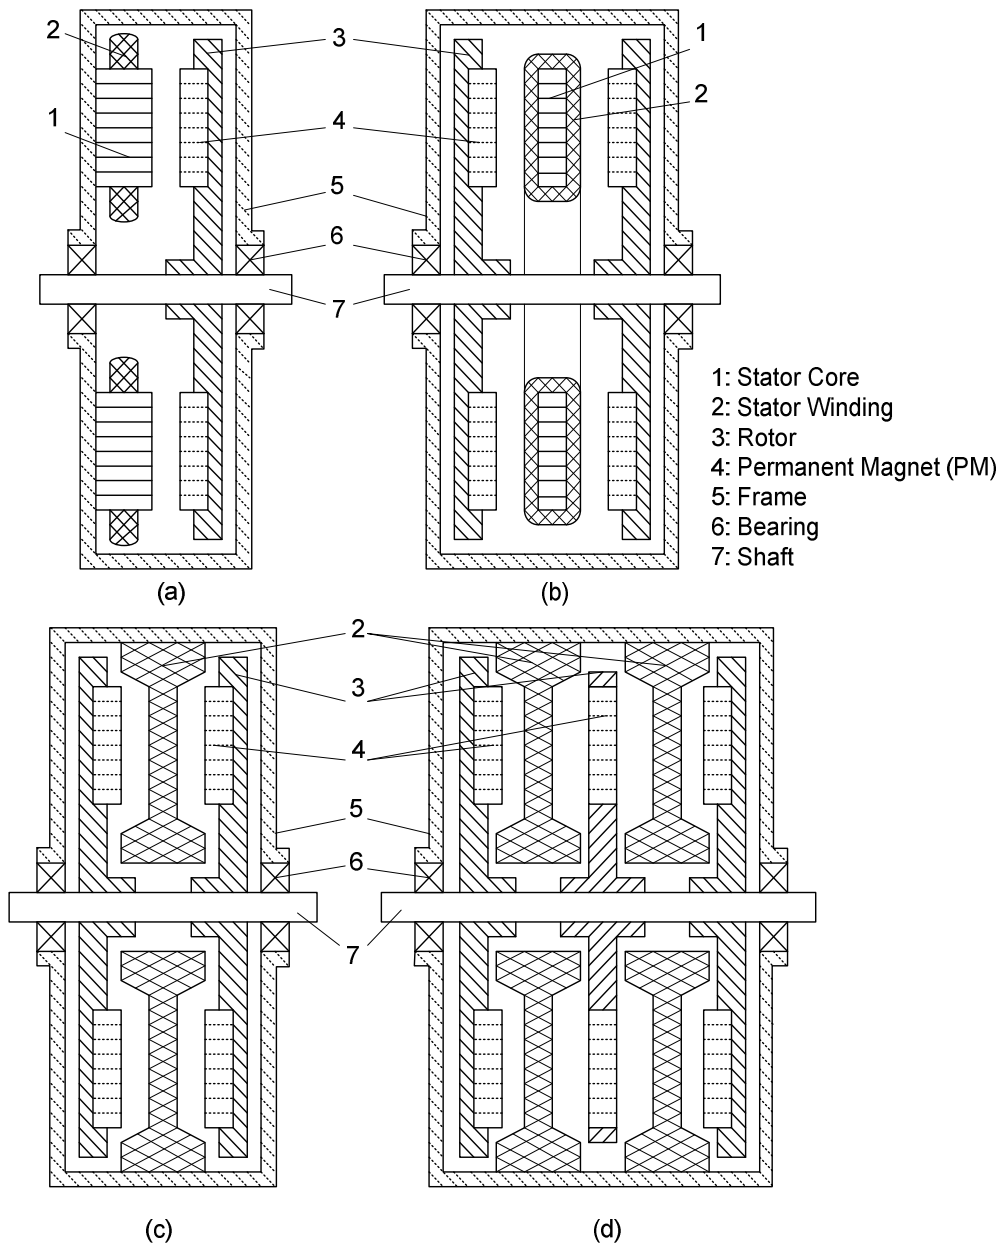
Axial flux permanent magnet generators: (a) single-sided slotted machine, (b) double-sided slotless machines with internal stator, (c) double-sided coreless machine, (d) Multistage axial flux permanent magnet generators.
